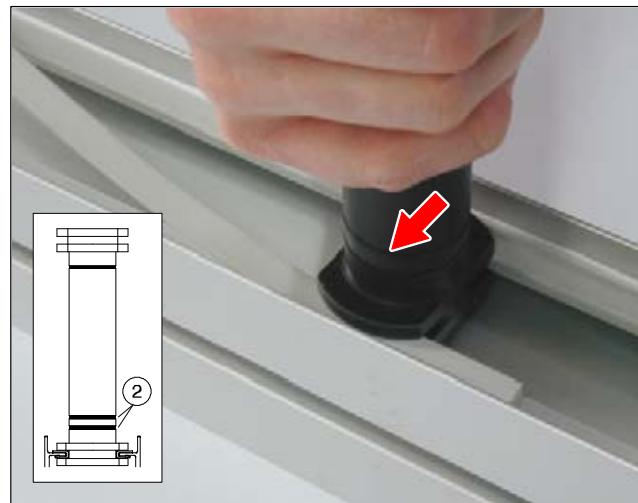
Assembly mandrel - Installing the 2nd sliding strip
